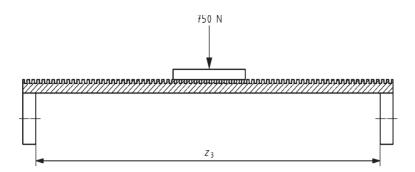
Belt (sectional view) (EN 115-1, Figure 8)
